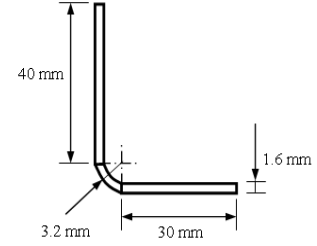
Dimensions of the cross-section of the L-shaped stringer
